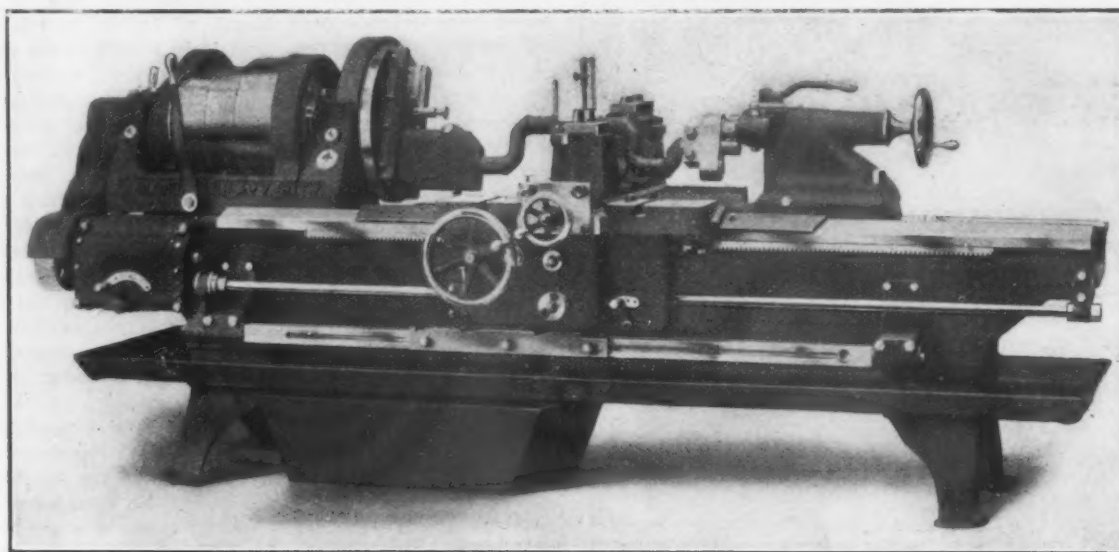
One of These Lathes Specially Equipped for Turning Crankshafts.
